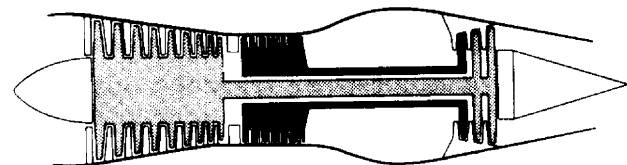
Split-spool compressor—dual rotor turbine.
